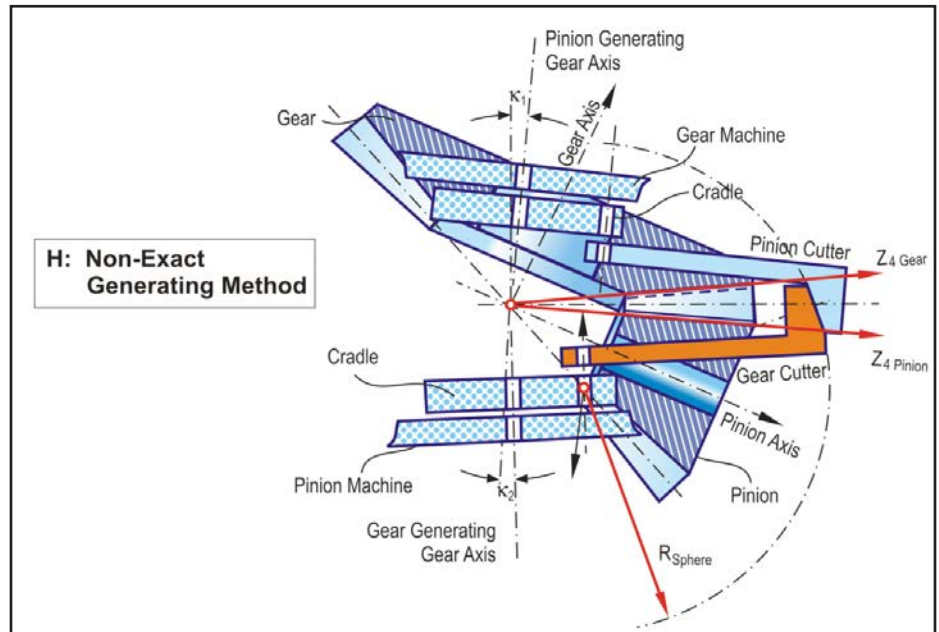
Generating model for bevel gears with tapered depth teeth — Method H, spherical flanks.
